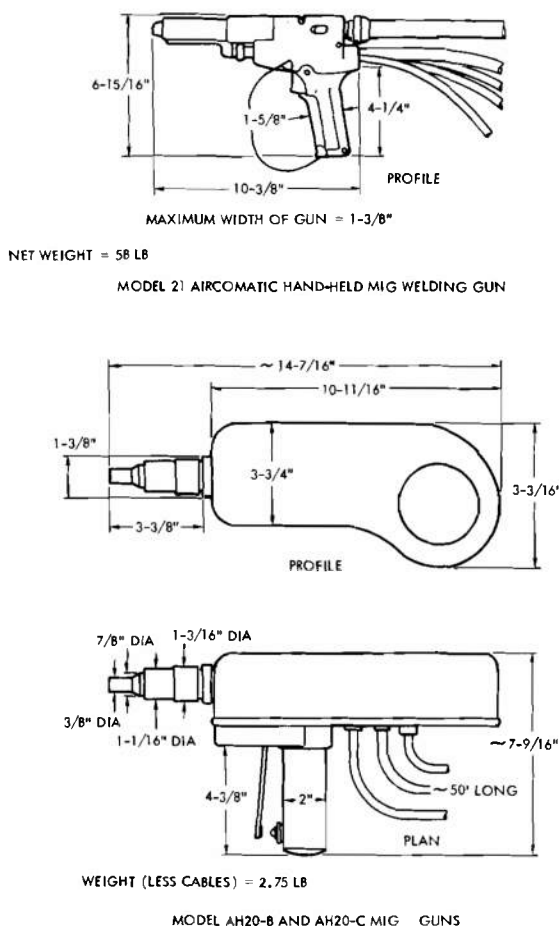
Typical MIG Hand-held Welding Guns
